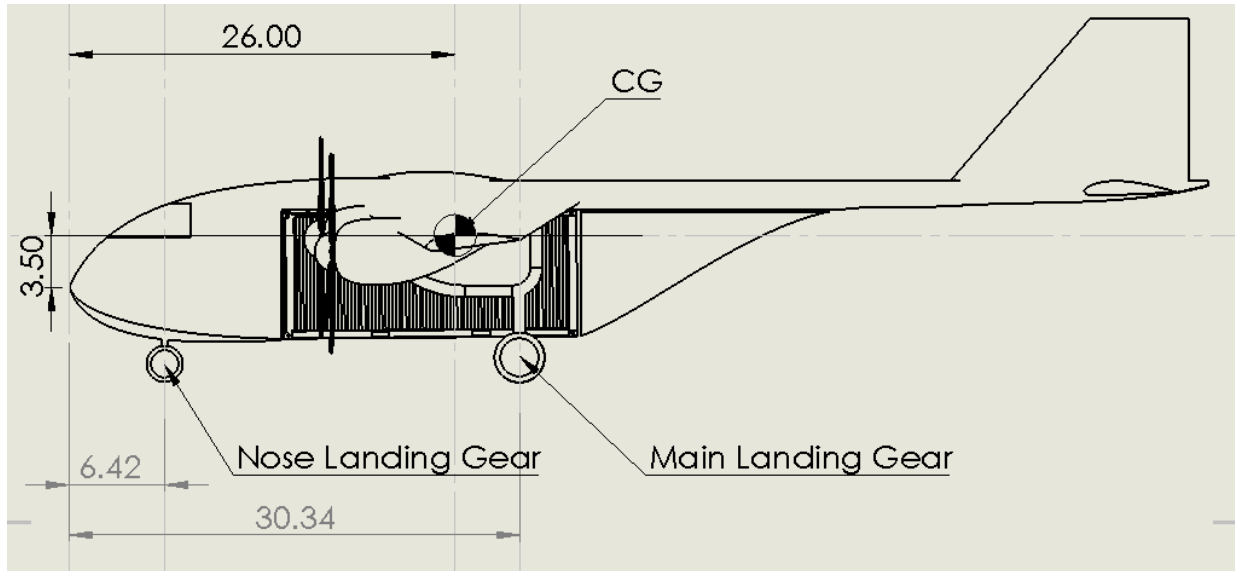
Position of CG and landing gears. All dimensions are in ft.
